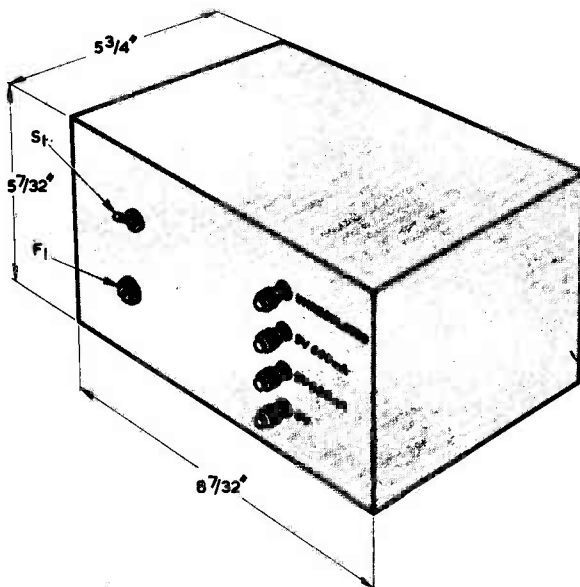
A suitable front panel layout. The dimensions apply to the case employed by the author
